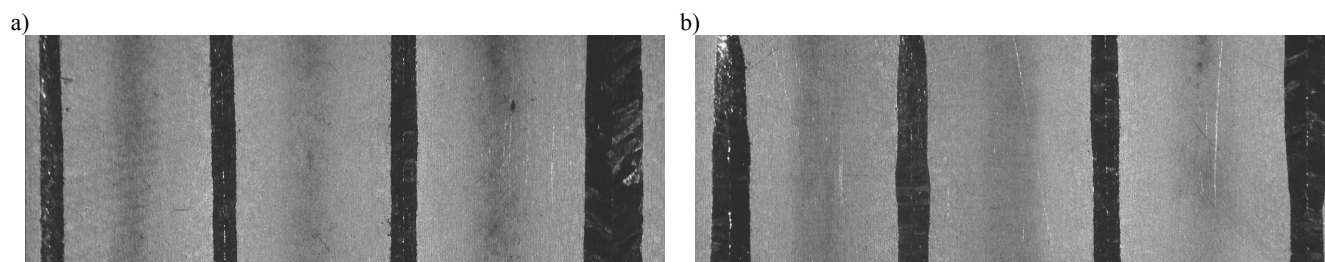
A view of bead-on-plate welds on titanium alloy Ti6Al4V sheet 1.5 mm thick laser welded with the HPDL ROFIN SINAR DL 020 (Table 5); a) face of the welds (P1 from left), b) root of welds (P1 from left)
